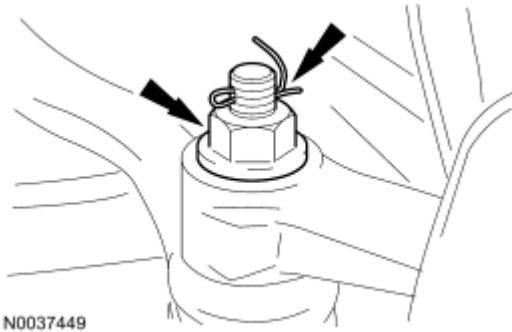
Locating Tie-Rod Ends Nuts And Cotter Pin
